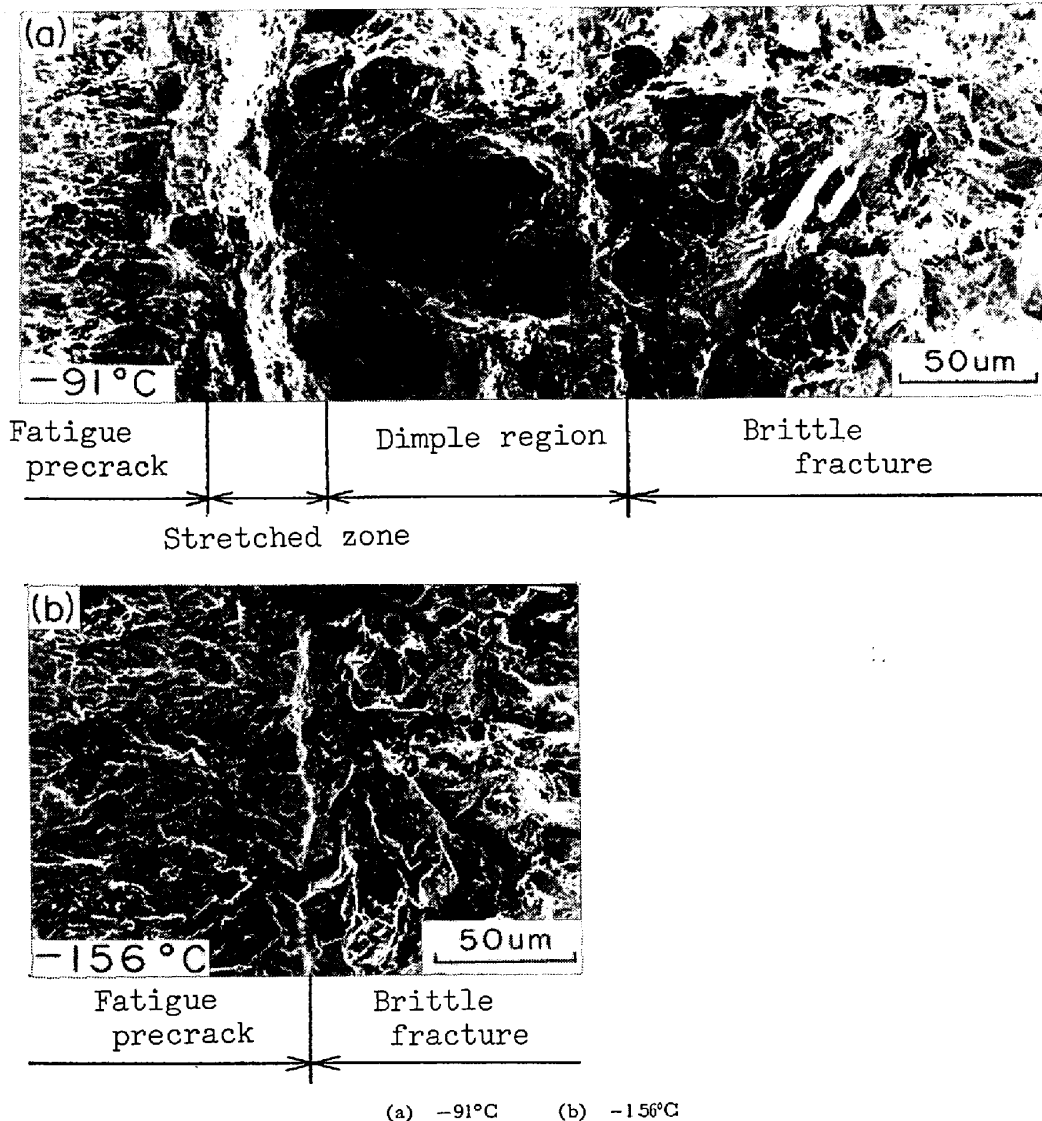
Scanning electron fractographs of the HT 60 steel specimen fractured at low temperatures.
